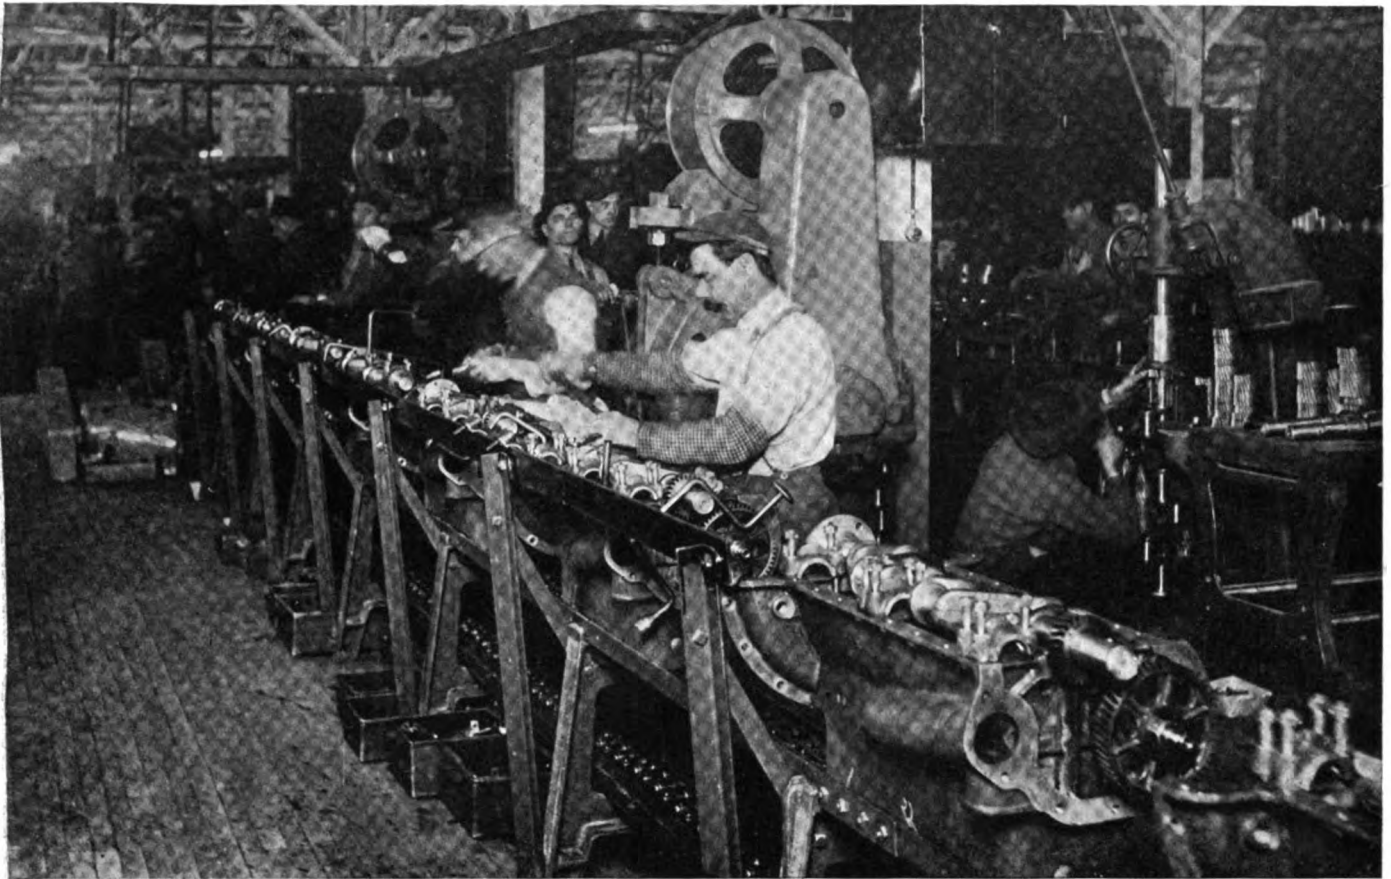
First section of cylinder block assembly chain, where bearings are adjusted
